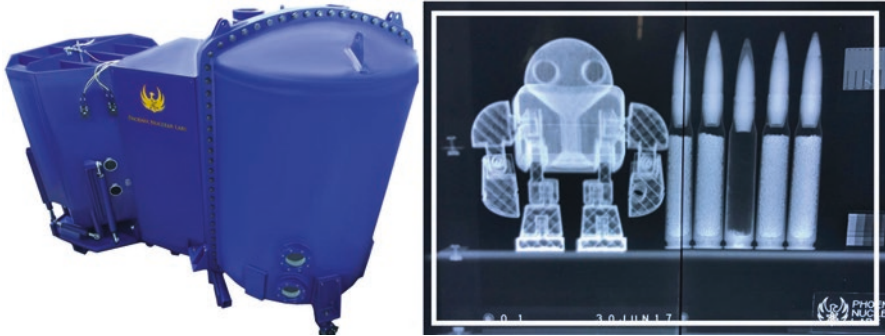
Left, Phoenix Nuclear Laboratories' Thunderbird machine, which has produced 100 billion neutrons per second for 131 hours continuously. This machine costs about \$1 million and is a bit smaller than a car. Right: examples of parts that have been imaged using neutron radiography
